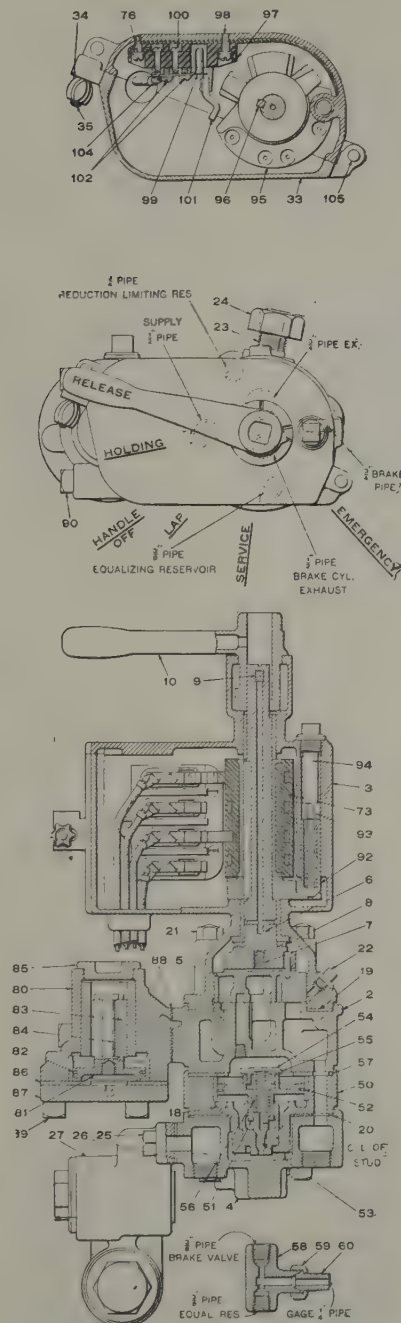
Motorman's Electro-Pneumatic Brake Valve, Type ME-23.
